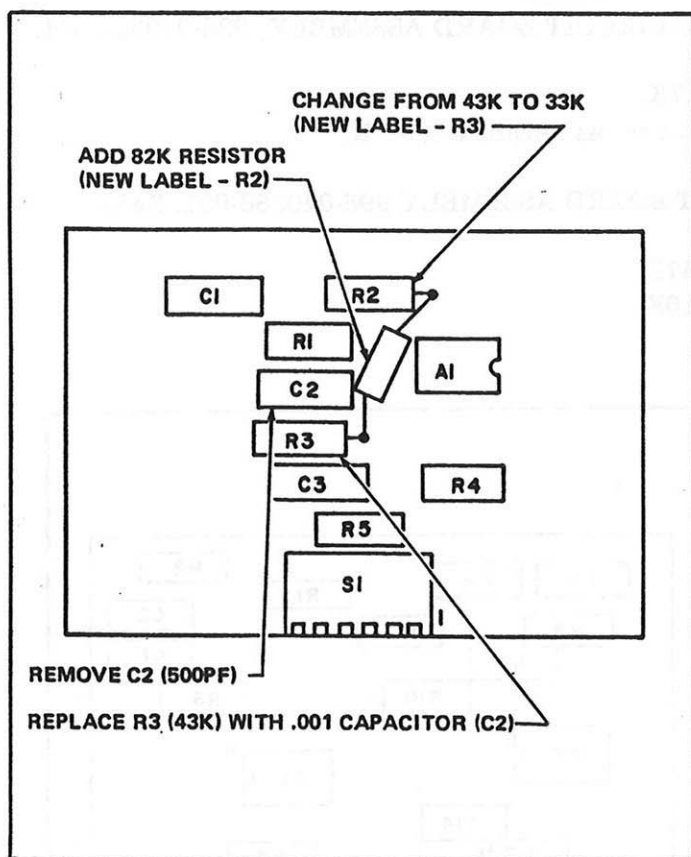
MODIFICATION OF STRING FILTER BOARD 1
